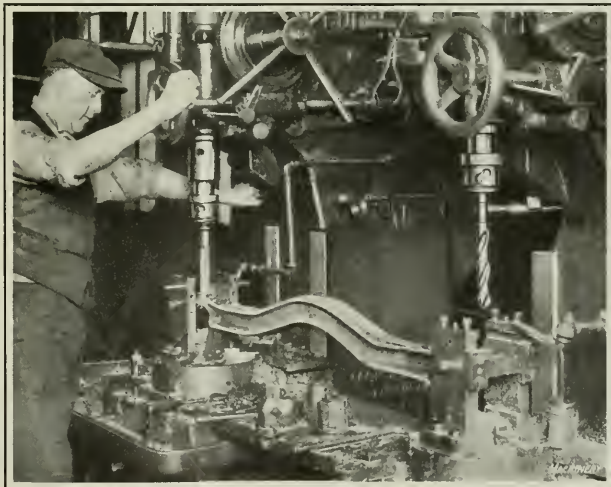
Two-spindle Drilling Machine machining Motor-truck Axles
